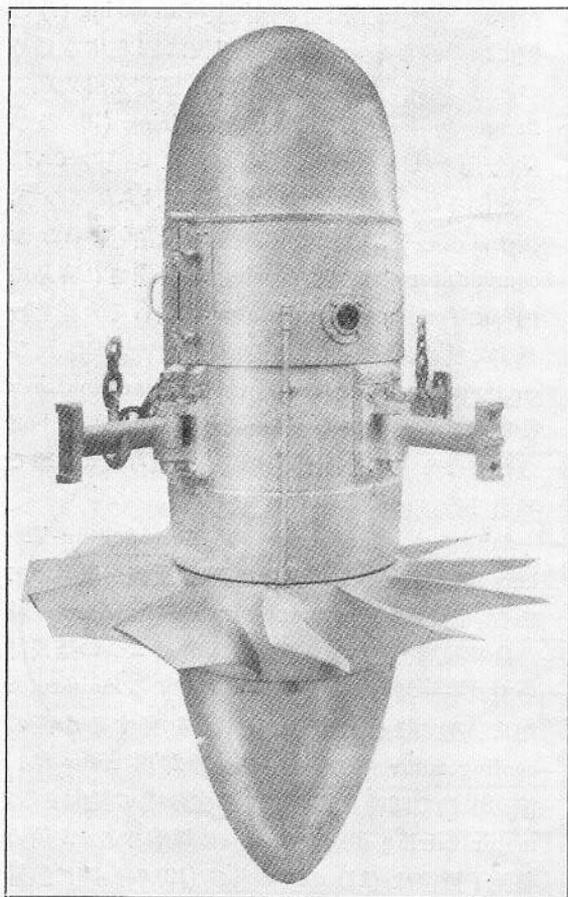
Completely Assembled Inner-body Rotor, Motor and Fairings.
